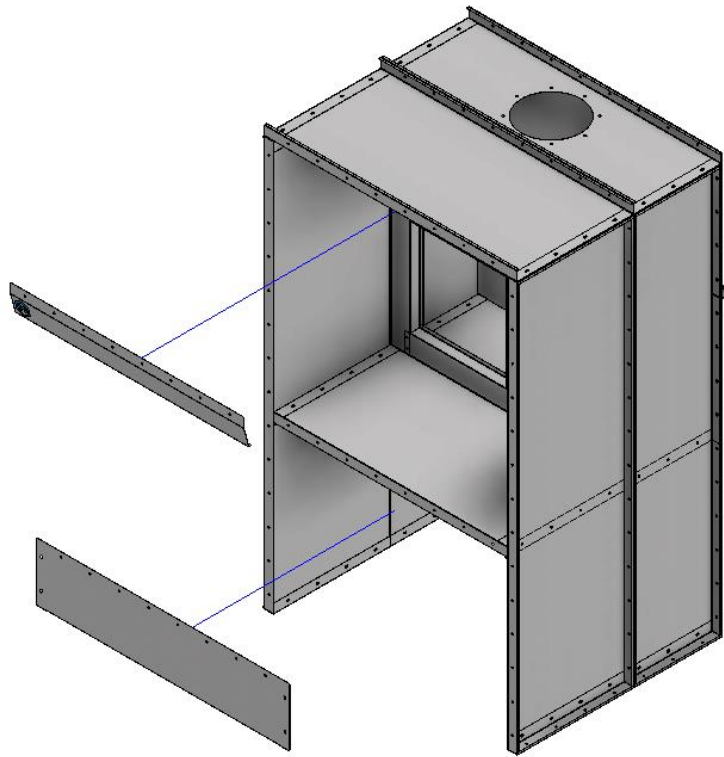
Assembly of Fire Guard & Shelf Stiffener
